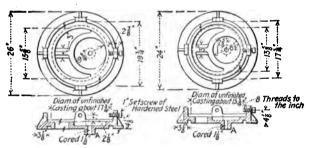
Fixtures for boring eccentrics to fit axle.
